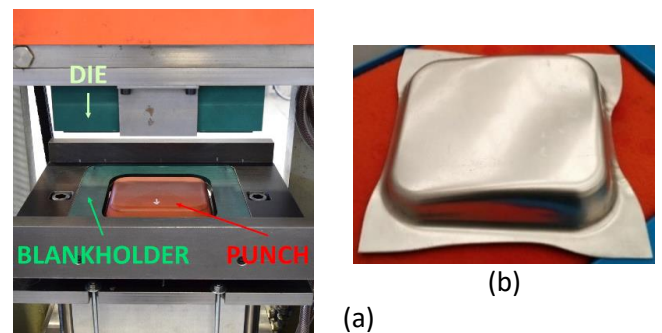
(a) STAMPING TOOLS MOUNTED ON THE PRESS, PUNCH AND BLANKHOLDER ARE VISIBLE; (b) THE STAMPED COMPONENT MADE WITH THE INITIAL GEOMETRY OF THE TOOLS.
